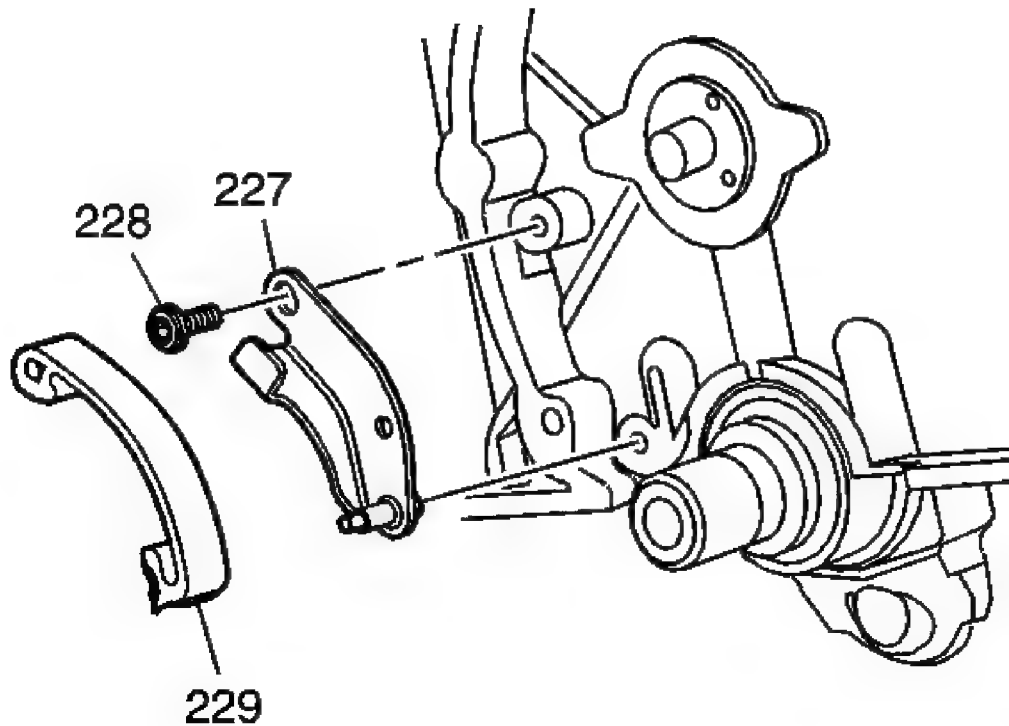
View Of Timing Chain Tensioner Bracket, Bolt & Shoe
